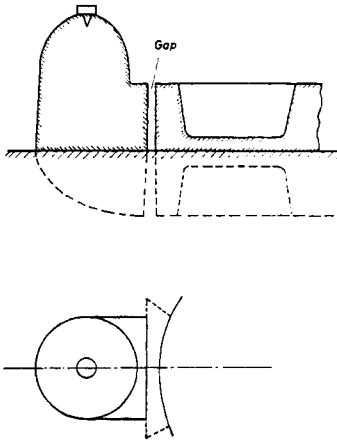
A gap is left between pattern and feeder head for fitting the breaker core during moulding.
